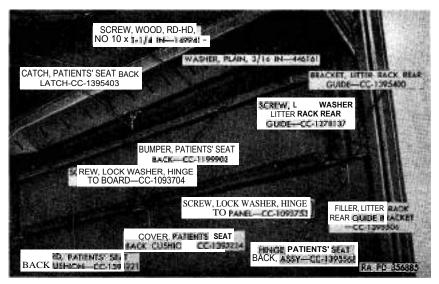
Patients' seat back cushion assembly and litter rack rear guide bracket.
